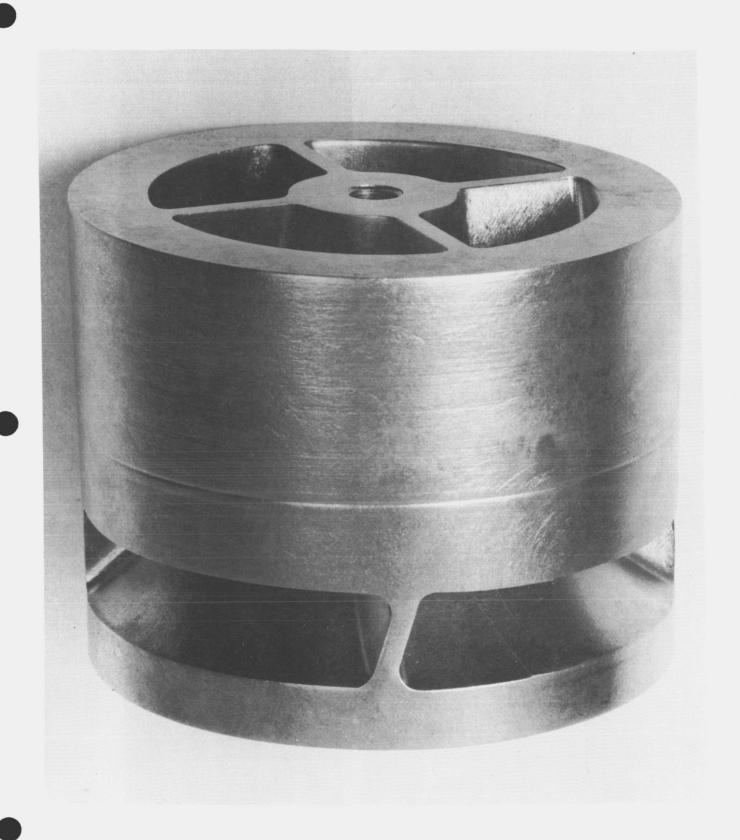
Final Simulated Impeller Showing Discharge Area After Removing 0.020 of an Inch of Material From All Surfaces by Chem-Milling.
